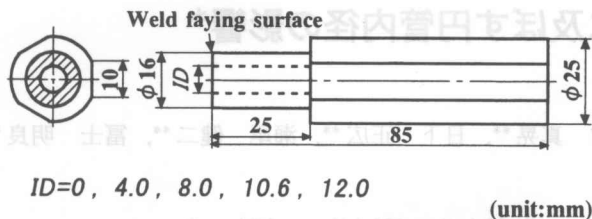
Shapes and dimensions of friction welding specimens.
